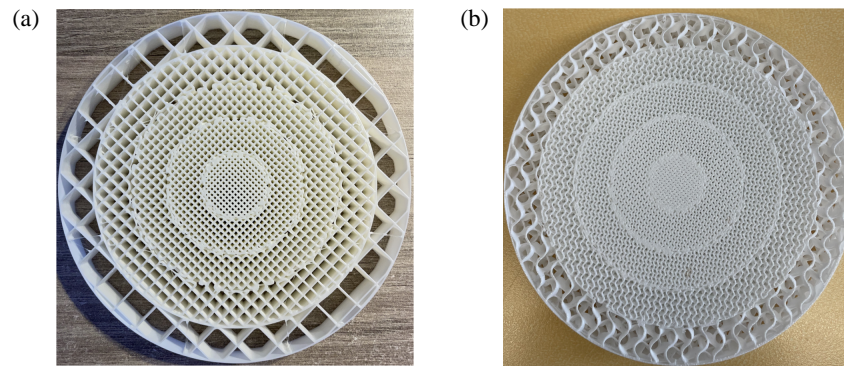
Cross-sectional views of the printed spherical lenses showing the infill patterns used for each concentric shell. (a) Grid pattern. (b) Gyroid pattern.
